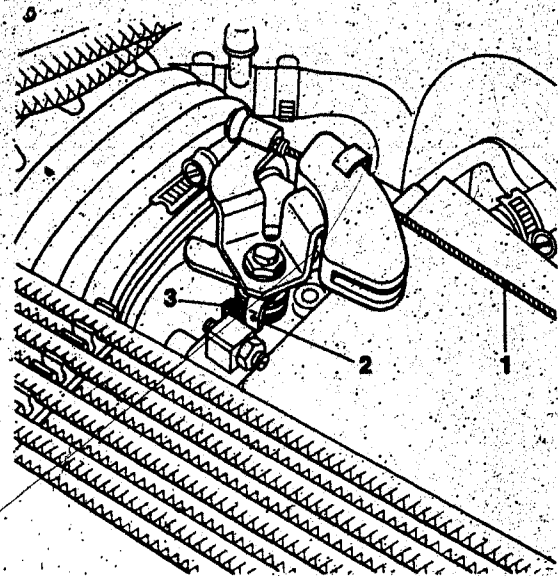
Throttle valve control for the cruise control unit in the Audi 100 (5000)
